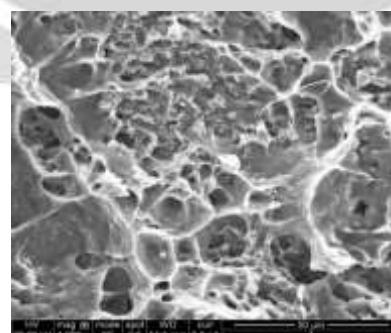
SEM Photomicrograph of fracture surface of Threaded Triflute Tool Pin Profile FS welded aluminum alloy
